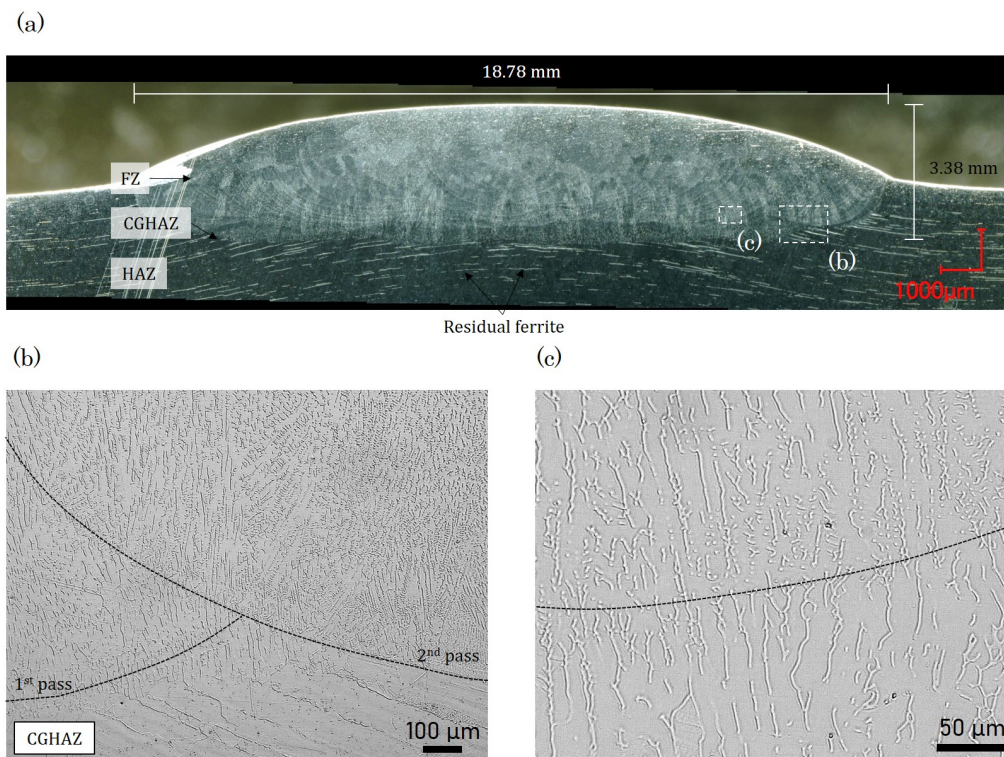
Geometry of the weld with different zones as observed by optical microscope of the multi-pass welded sheet, with: (a) overview of the whole weld pool; (b) the intersection of two weld pools from two different welding passes delimited by black dashed lines; (c) enlarged view of discontinuities of the vermicular/skeletal ferrite between two welding passes. Locations of images (b) and (c) are indicated in image (a).
